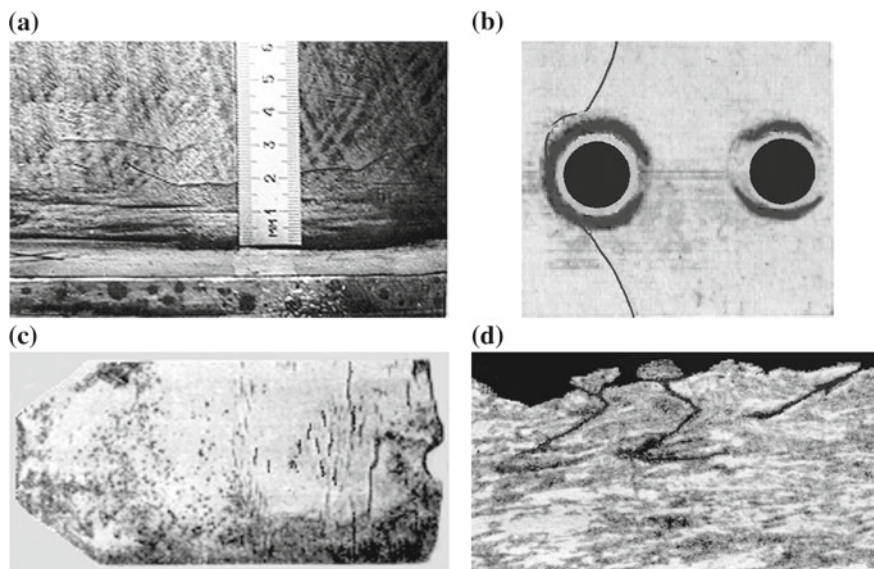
Fatigue cracks initiated from the site of damage by fretting: a in the axle set of the shaft [3], b under the rivet head [66], c on the surface of the plate of car spring [56], d on the surface of a rope wire [66]
